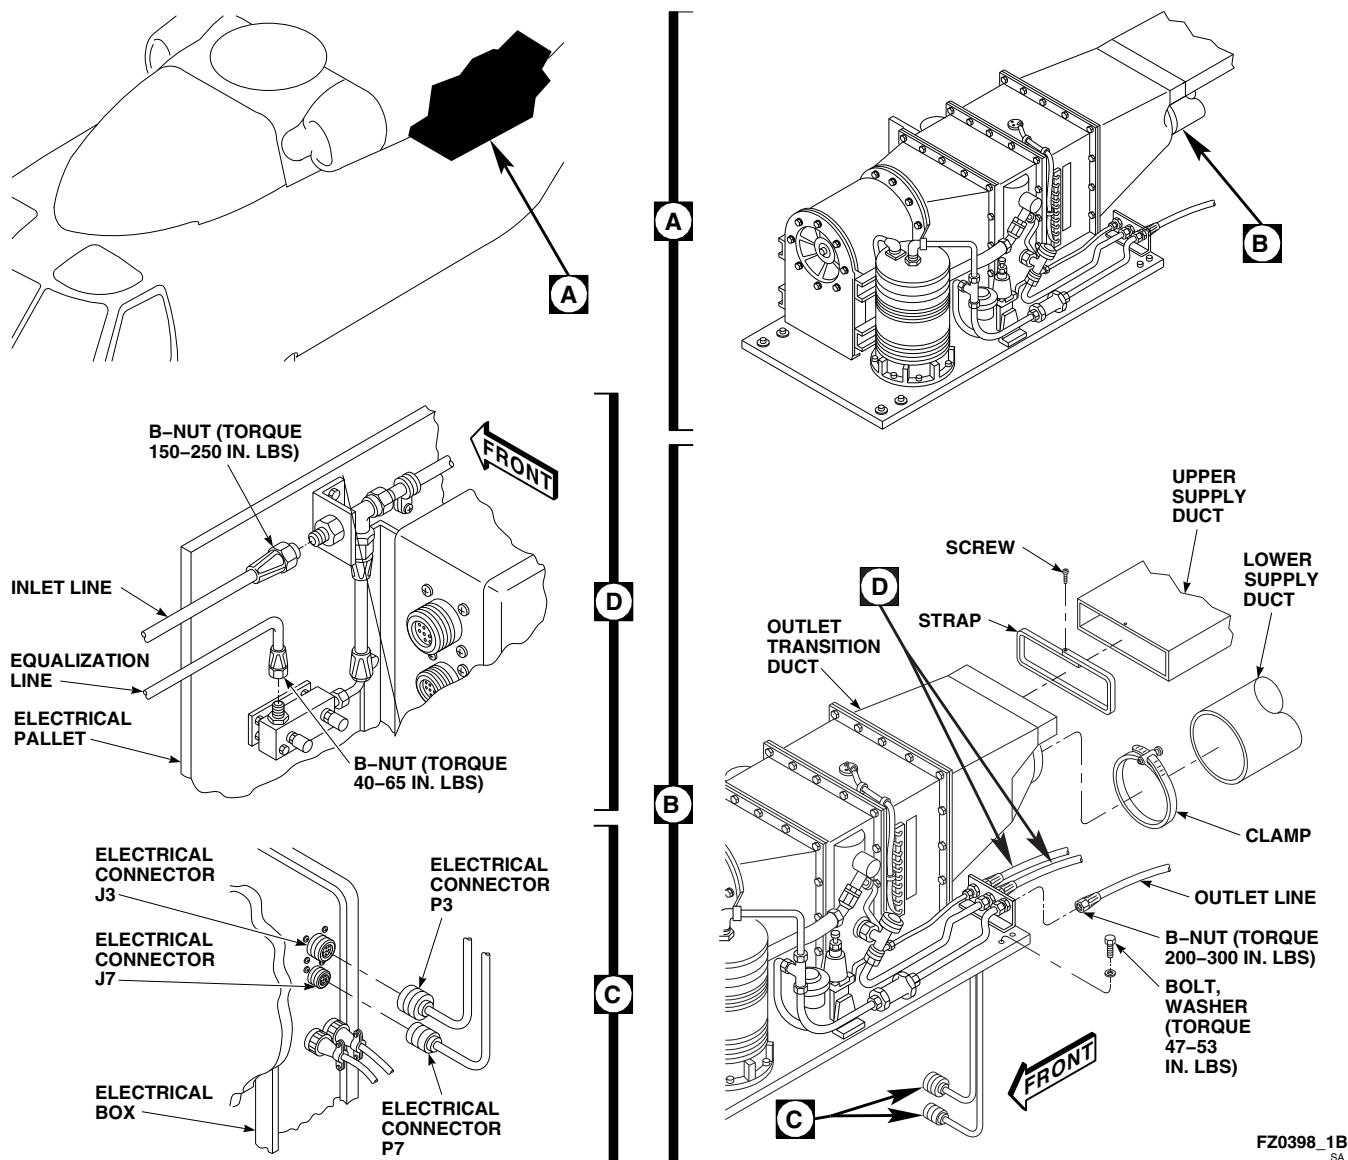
REPLACE ENVIRONMENTAL CONTROL SYSTEM EVAPORATOR PALLET (BENCH) (SHEET 1 OF 2)
